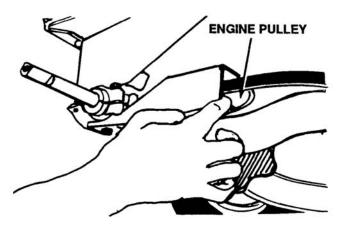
Pivoting Lower Outside Belt Guard Away From Engine Pulley
